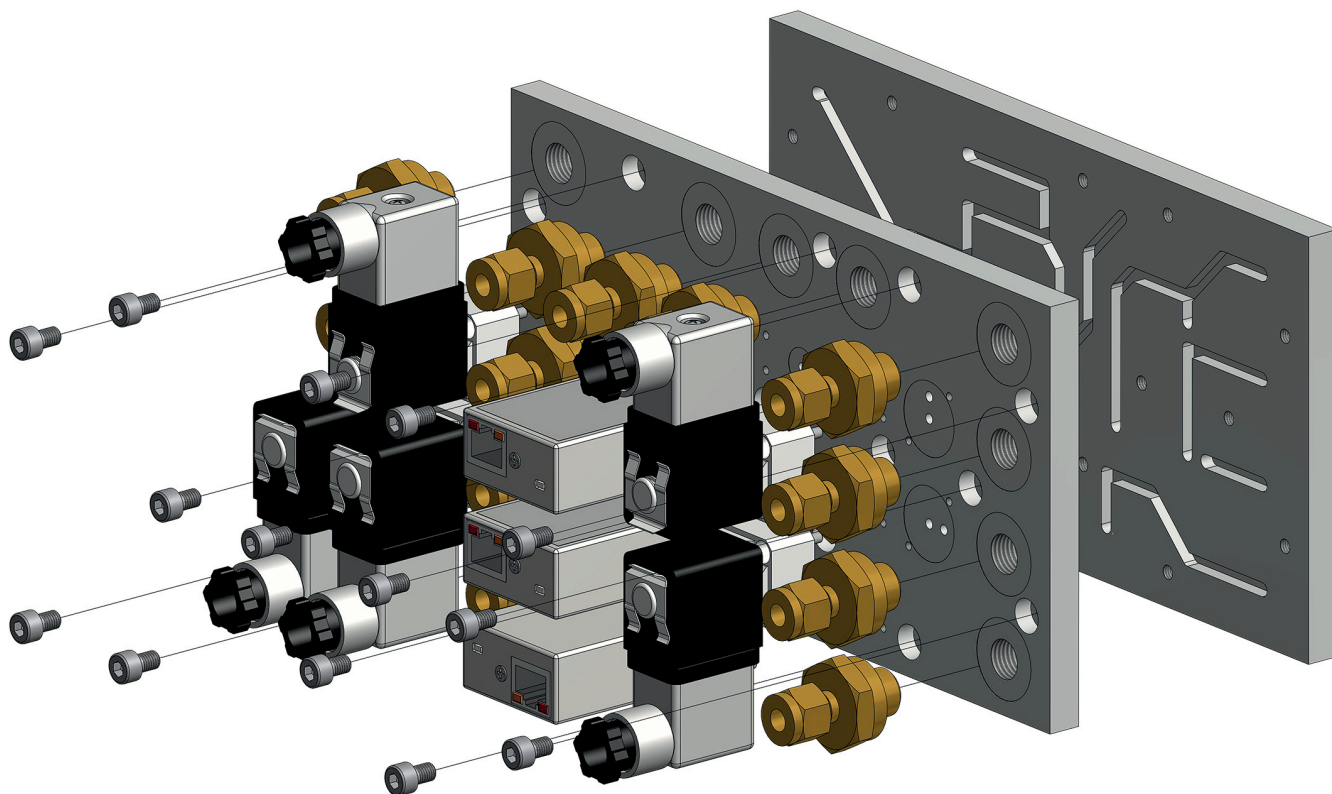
Exploded view of the gas flow circuit board, showing solenoid shut off valves, mass flow controllers, and the pressure controller. The screwed-in brass metal connectors serve two purposes: i) they connect the external gas supply to the circuit, the humidifier and eventually to the external pump; ii) they act as sockets for the environmental sensors and therefore allow their quick replacement in case of a failure.
